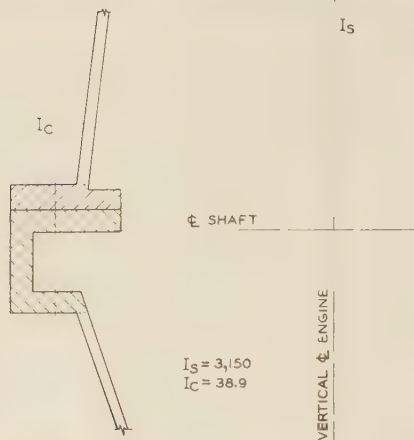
FRAME SECTION OF THE MARINE-TYPE ENGINE SHOWN IN FIG. 9
